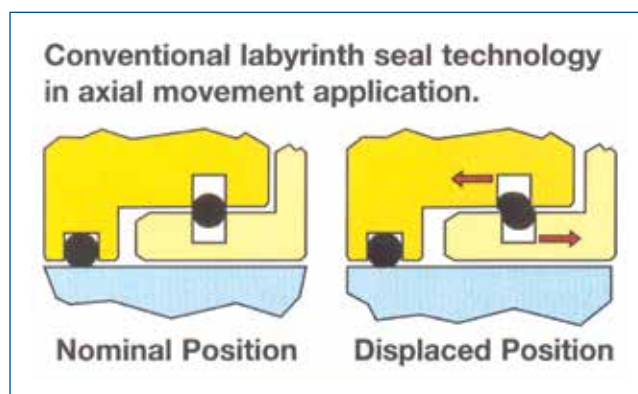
Radially moving O-rings easily damaged by sharp edges.
